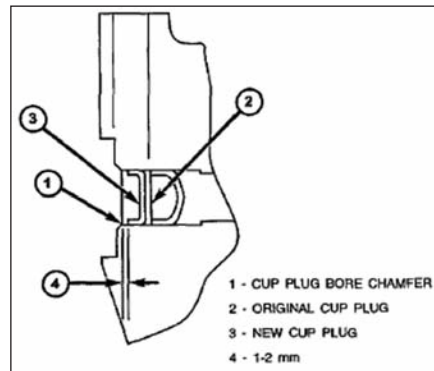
Drive the new cup plug on 2.7L engine into the bore until the flanged edge of the plug is just inside (1-2 mm) the chamfered edge of the bore.
